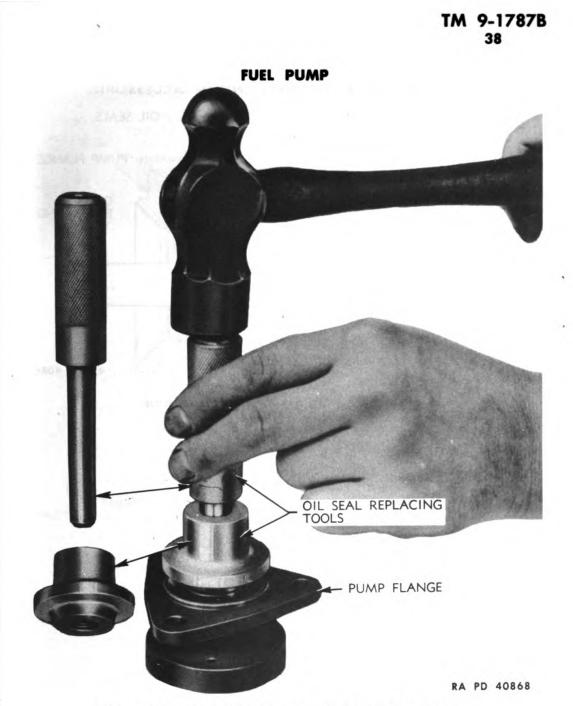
Installing Inner Oil Seal in Fuel Pump
